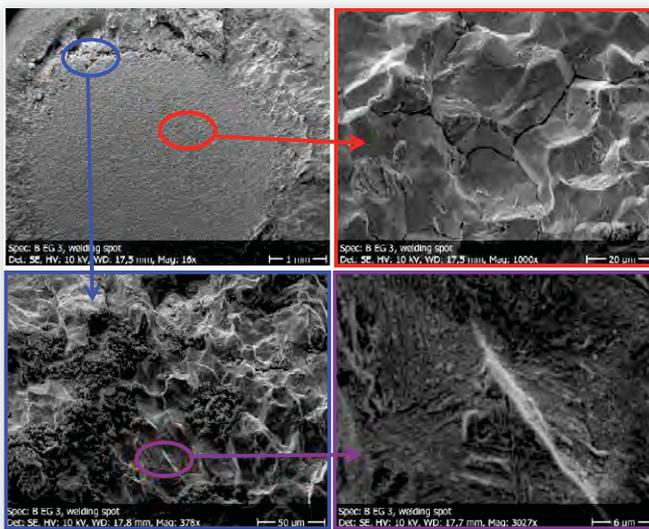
Fractographic examination of the failed spot-weld
